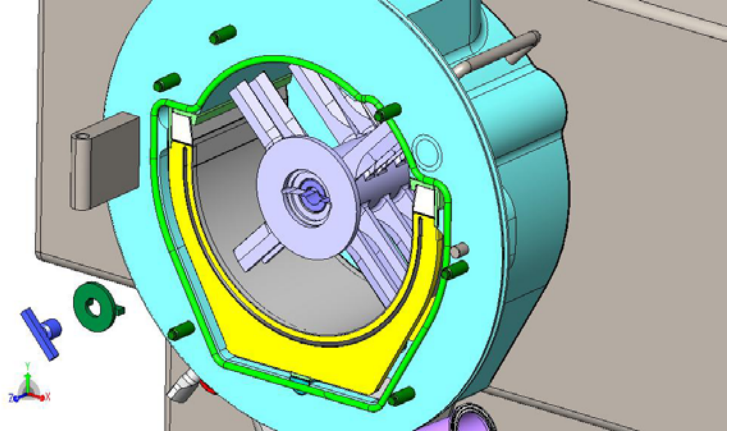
D6B rotor with Knife / Impact Blades
